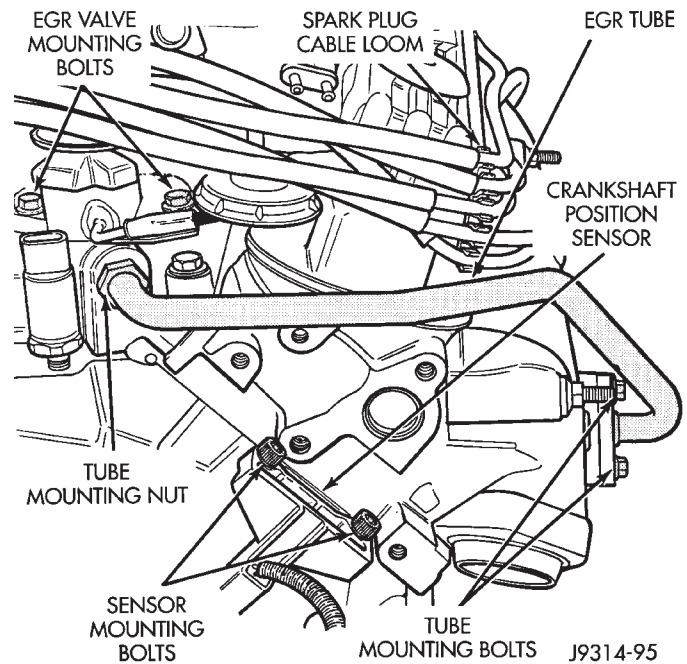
Crankshaft Position Sensor—4.0L Engine—With 42RE Transmission
